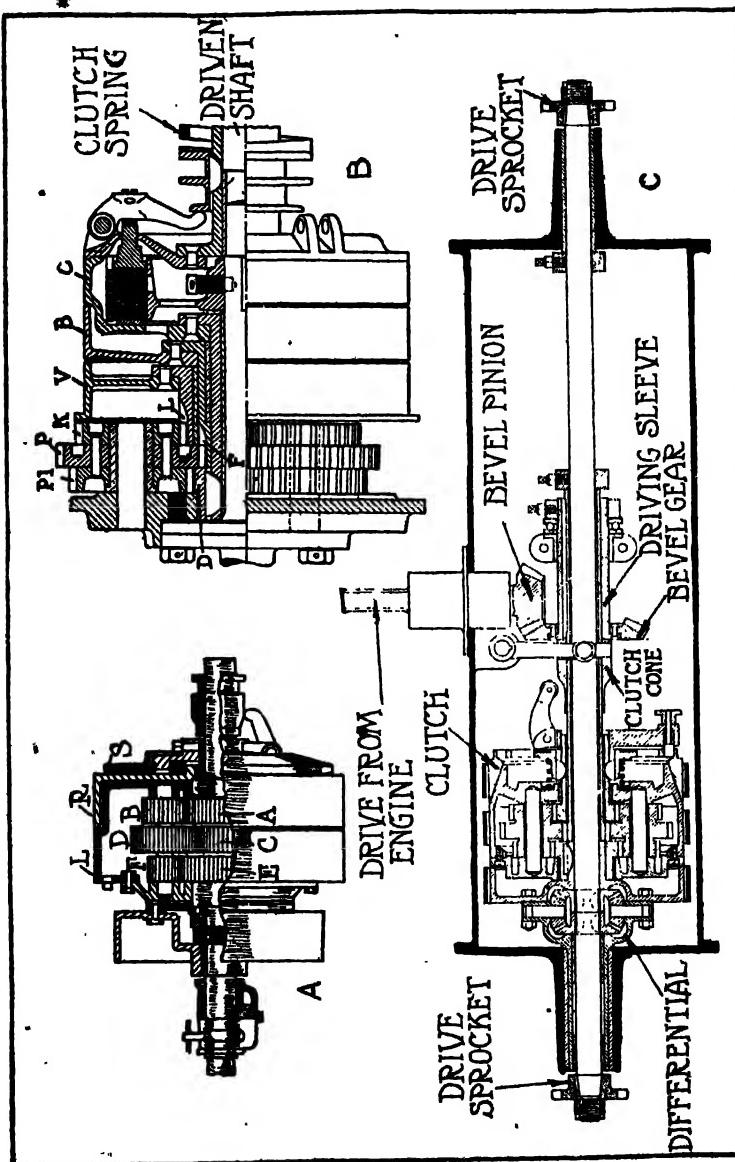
Outlining Construction of Modern Planetary Transmission Gearing.
